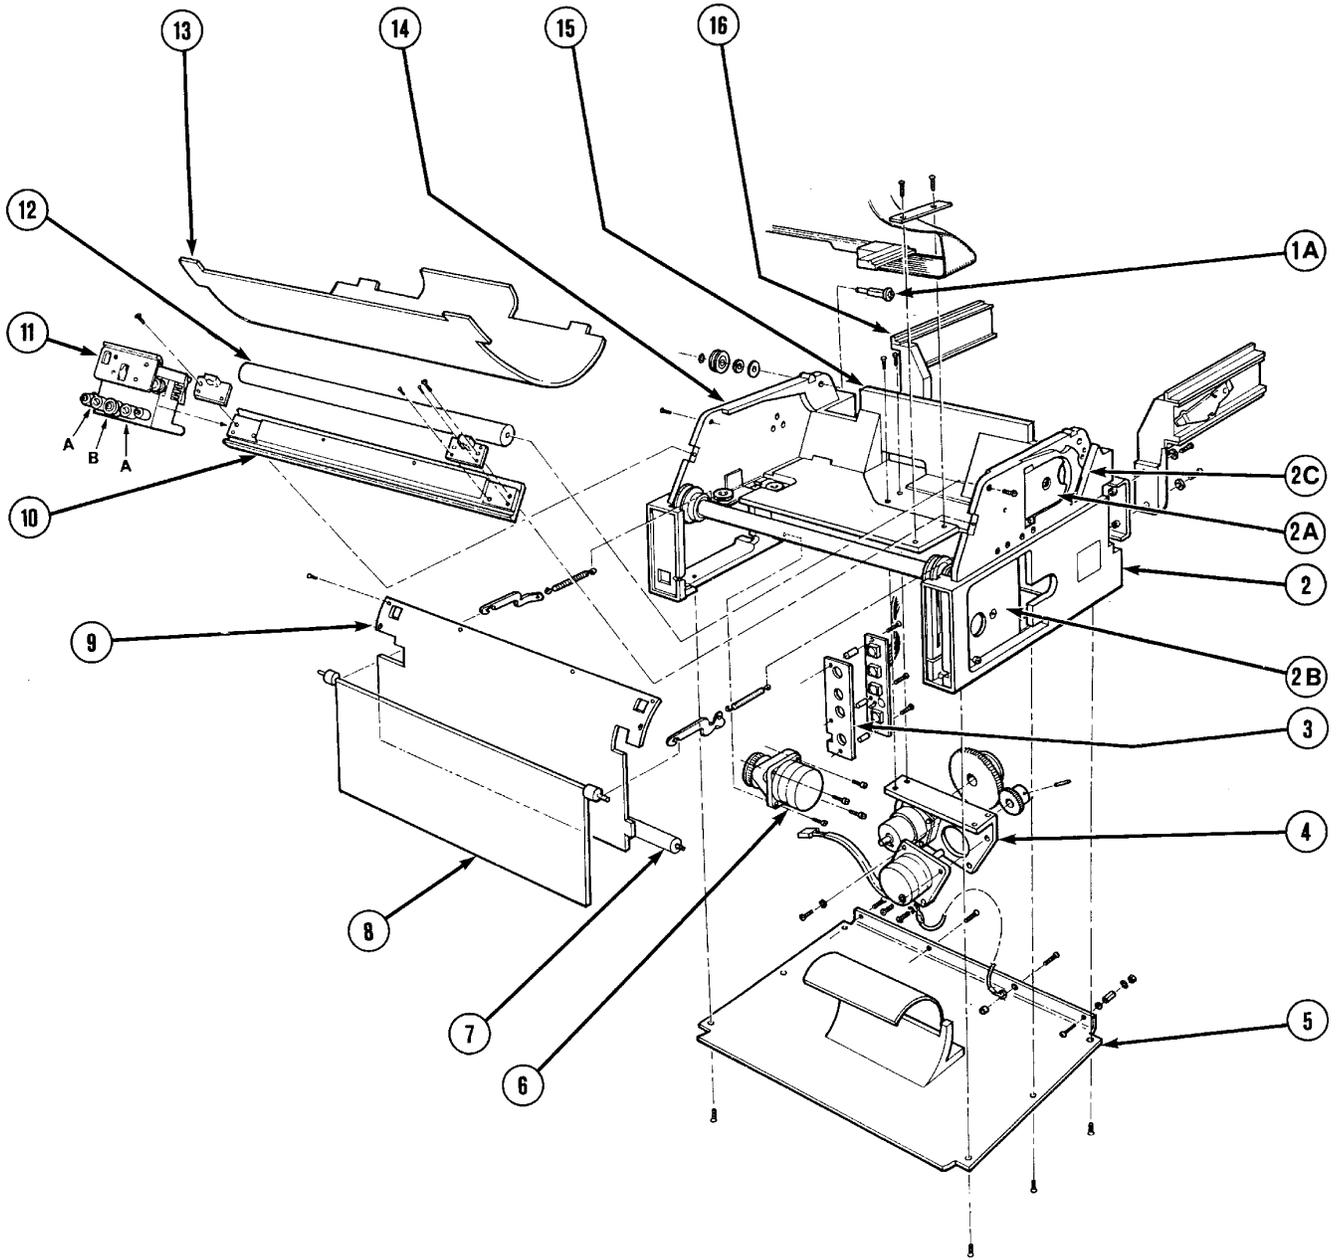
Exploded diagram: Writing system (original design) sheet 1 of 2
